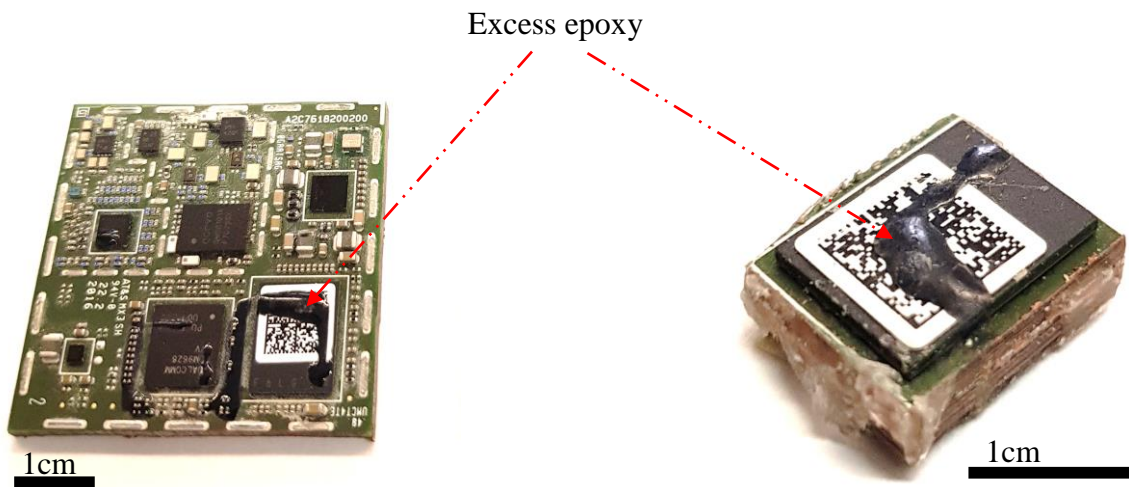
Left PCB with several ICs, capacitors and resistors mounted. Excess epoxy defects are visible on the top of some ICs. Right) Enlarged a small portion of the board (cut sample) is prepared for measurement from CT.
